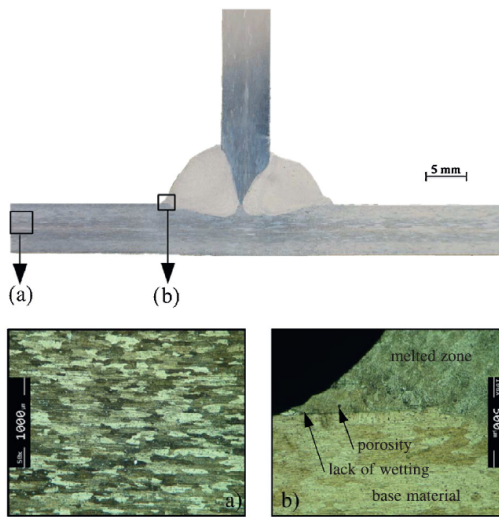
Metallographic analysis of MIG welds: (a) base material and (b) toe of weld.
